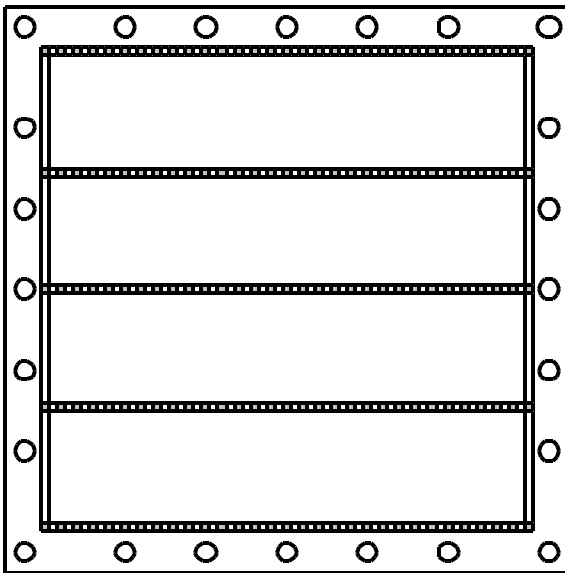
Corrugated aluminum fins to mount over support structure shown in figure 4. Ends will be soldered, brazed, or epoxied, depending on best method of providing hermetic seal.
